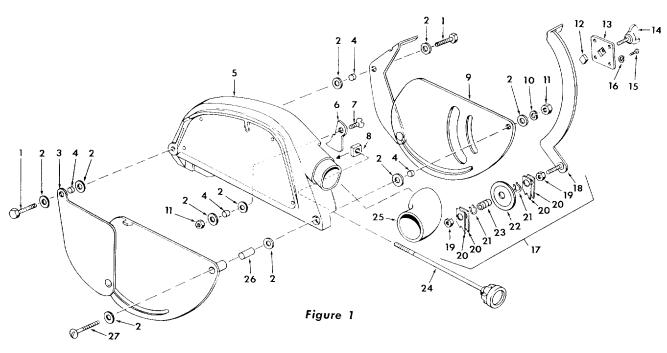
PARTS LIST-63265 GUARD ASSEMBLY
